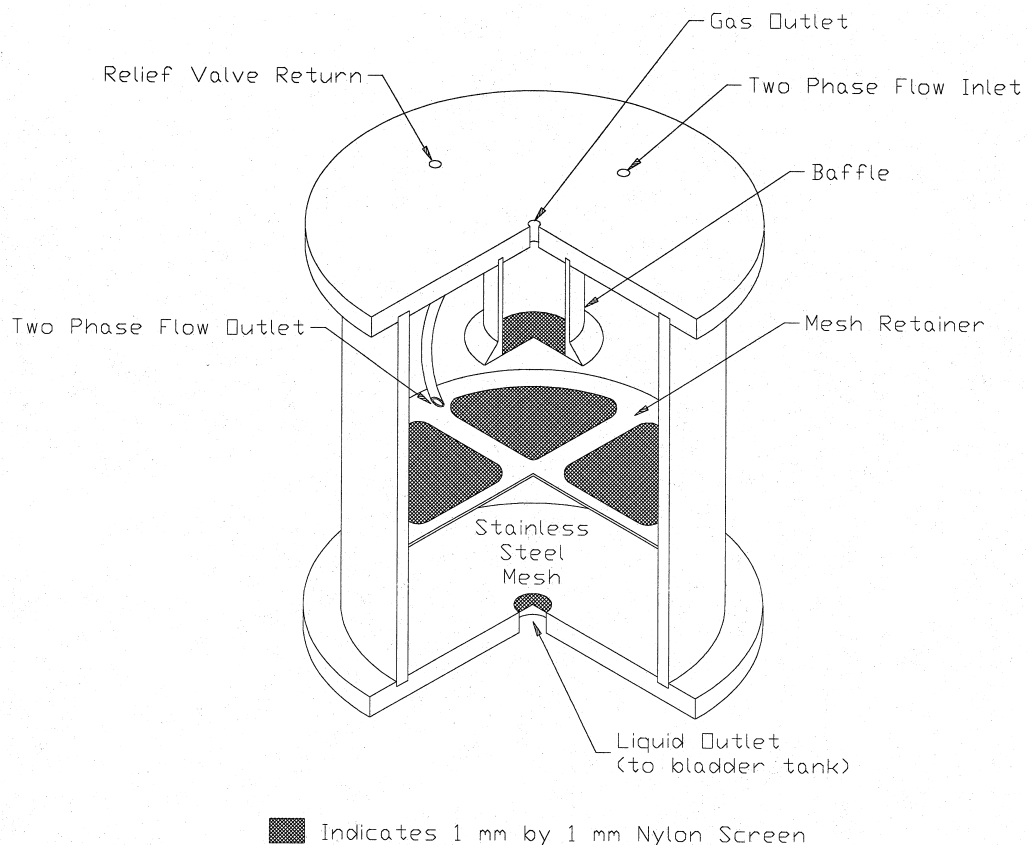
Cutaway of separator tank (stainless steel mesh omitted for clarity).
